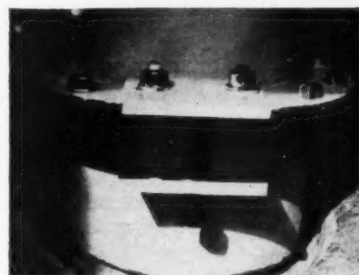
Flanges with jack screws, for a large bursting disc assembly.
